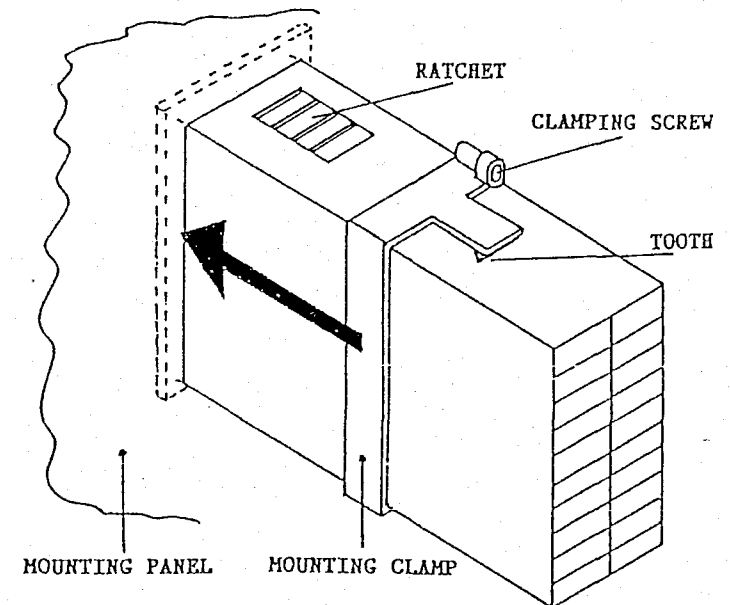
ATTACHMENT OF HOUSING TO MOUNTING PANEL
